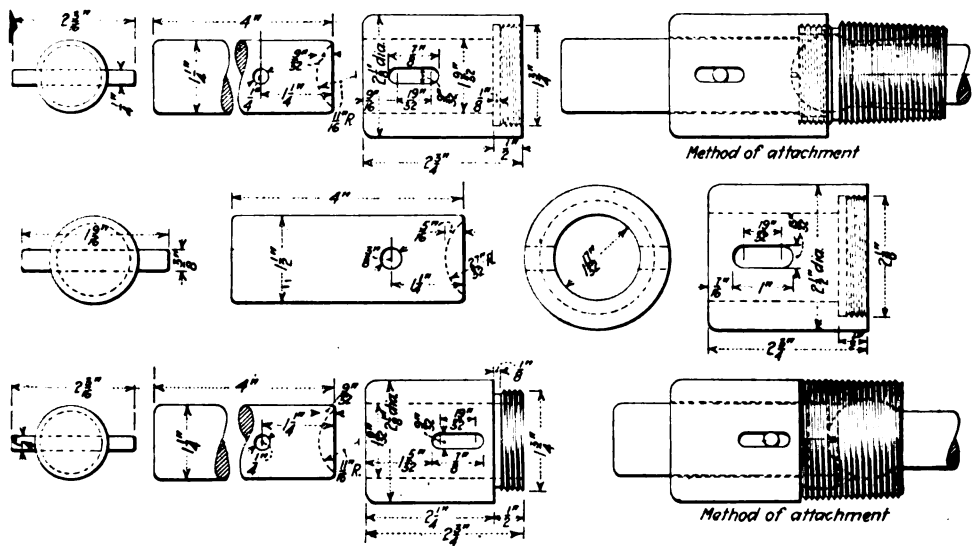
HOLDING-ON TOOLS FOR RIVETING FLEXIBLE STAYBOLTS
